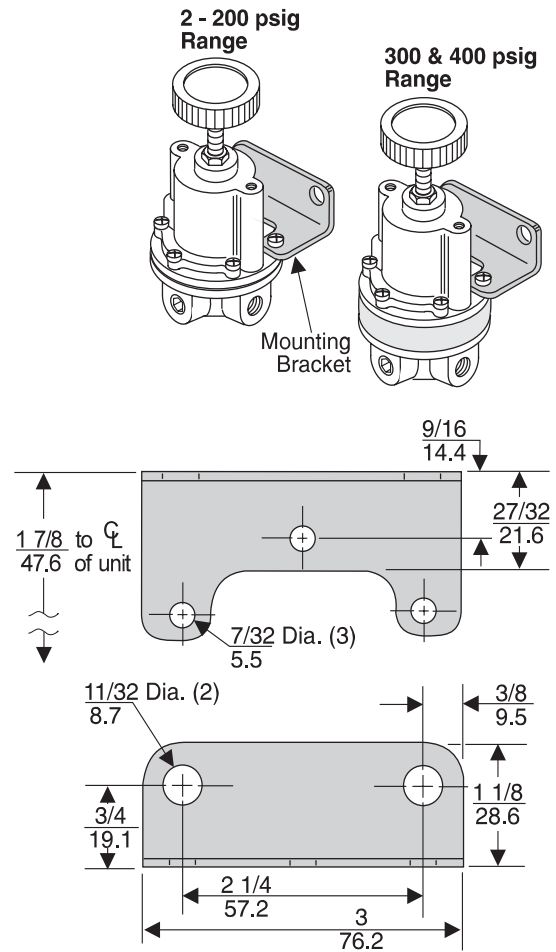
Mounting Bracket EB-09921 (Sold separately)
